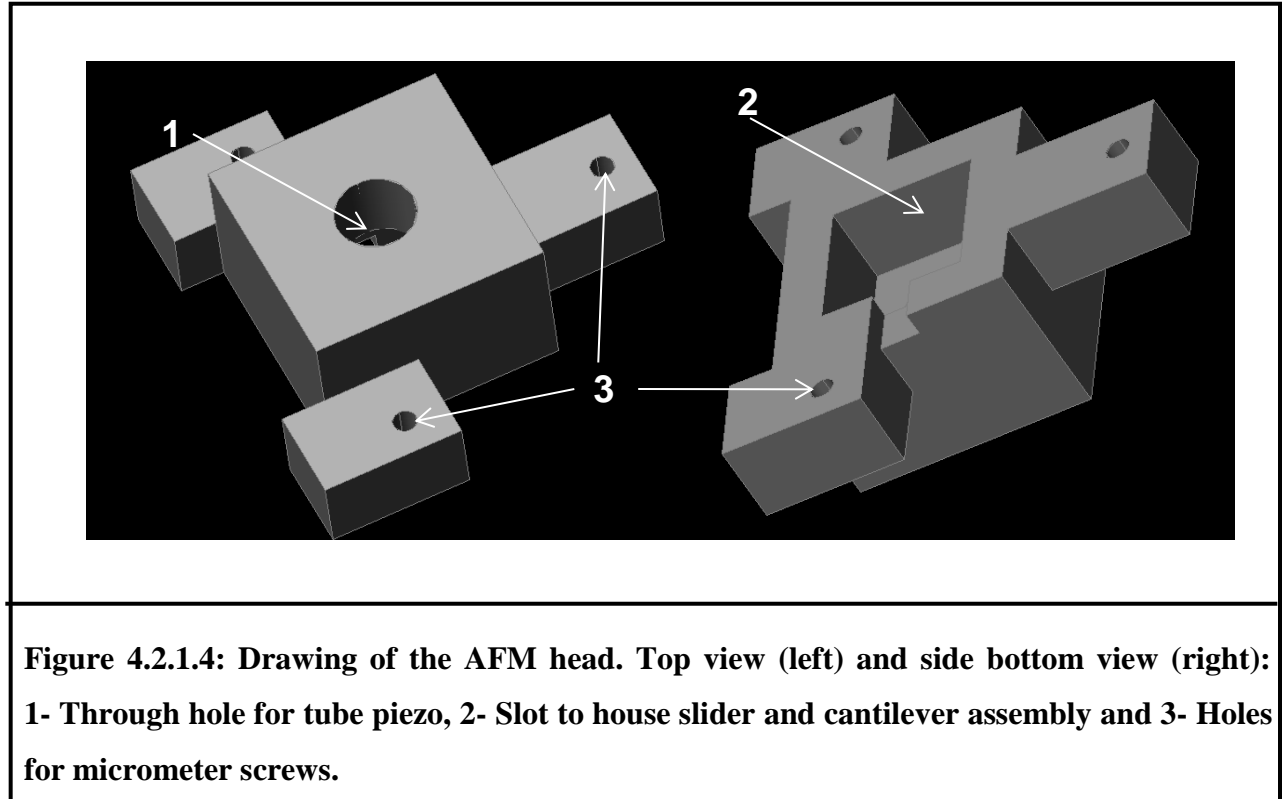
Drawing of the AFM head. Top view (left) and side bottom view (right): 1- Through hole for tube piezo, 2- Slot to house slider and cantilever assembly and 3- Holes for micrometer screws.
